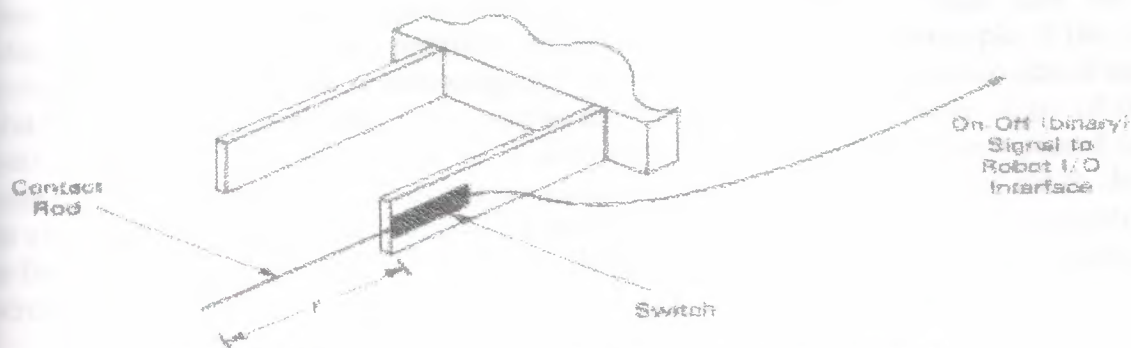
Simple contact rod proximity sensor mounted on one "finger" of a robotic gripper.
